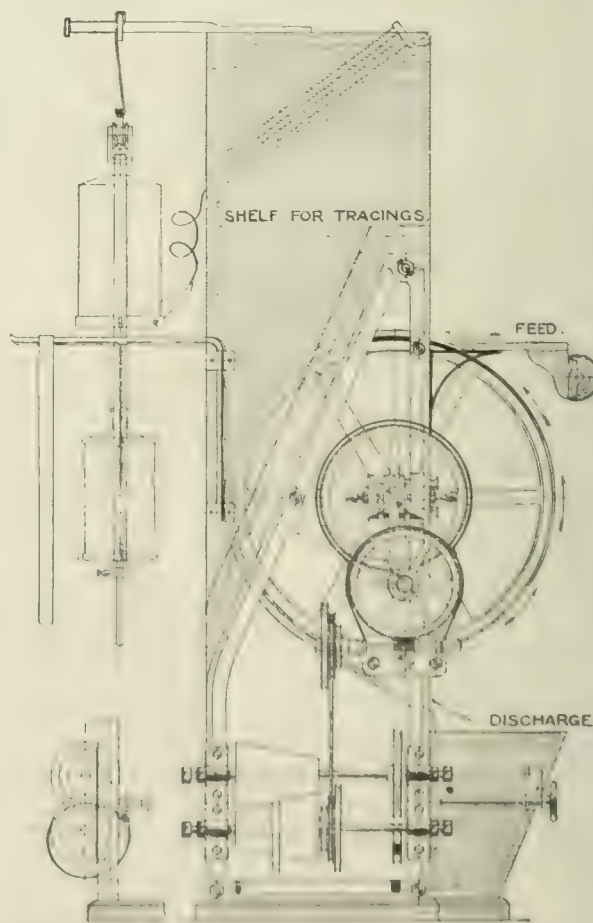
SECTIONAL VIEW OF PHOTOCOPIER.
